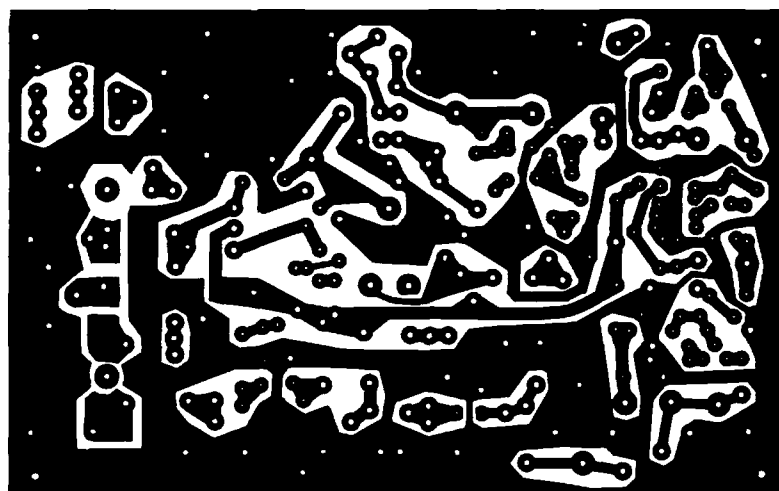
PC board foil pattern (component side shield layer). Solder leads on both side of the PC board where necessary.
